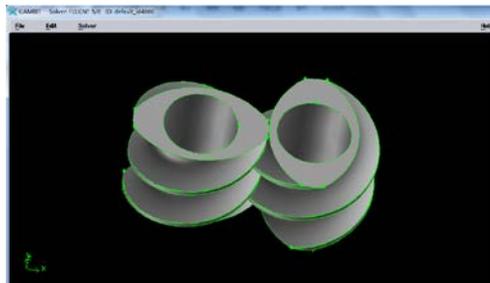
The three-dimensional model of co-rotating twin-screw extruder screw kneading
